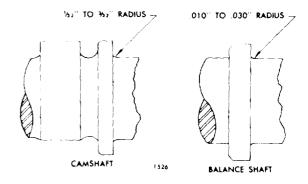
B-155. Cam and Balance Shaft Journal Fillets
